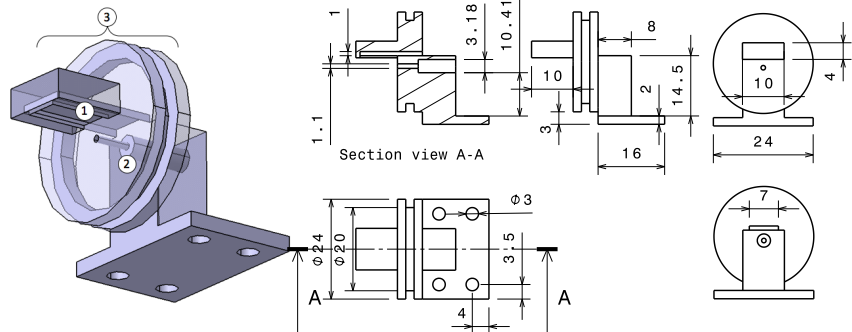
Drawing and size (in [mm]) of the 3D printed plug with scanners support (design 2)
